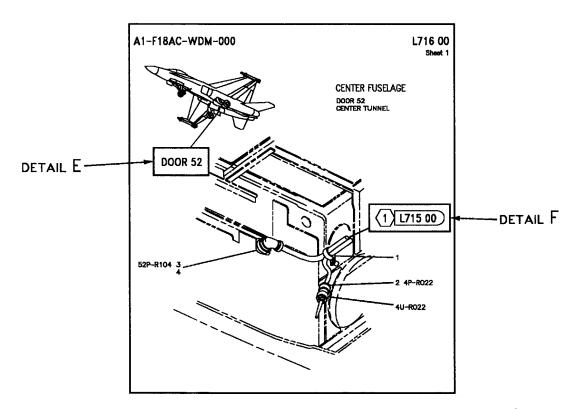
Installation and Removal of Cable Assemblies (Sheet 3)
